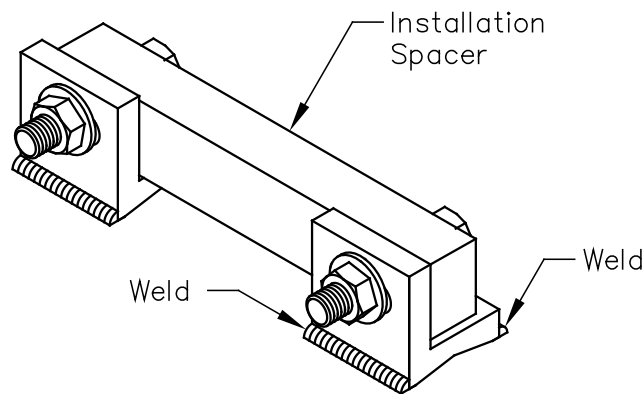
D – Welding Transducer Mounting Bracket / Installation Spacer
